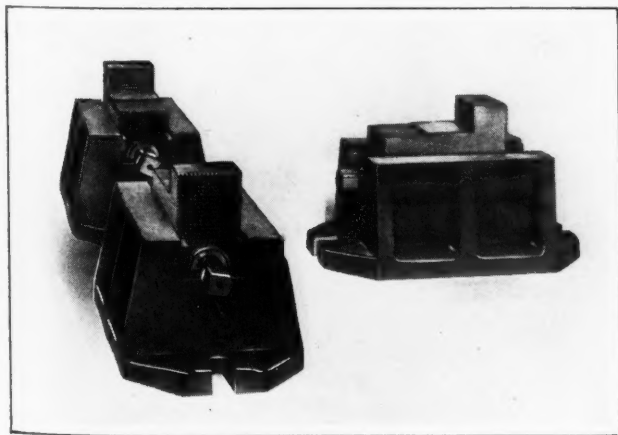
Ingersoll Adjustable Chucks for Use on Various Machines
